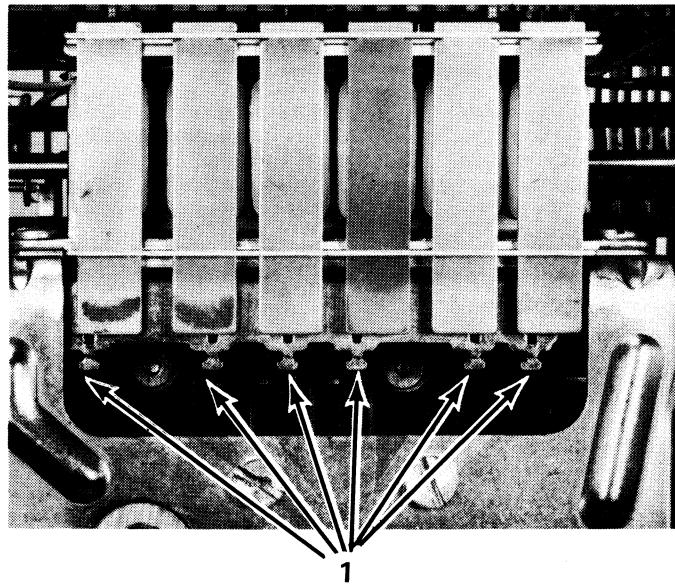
Tilt Selection Differential Removal (Bottom of Printer)
